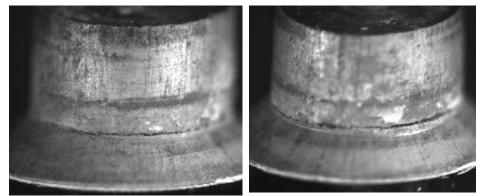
Cracked rivets retrieved from a corroded lap joint.
